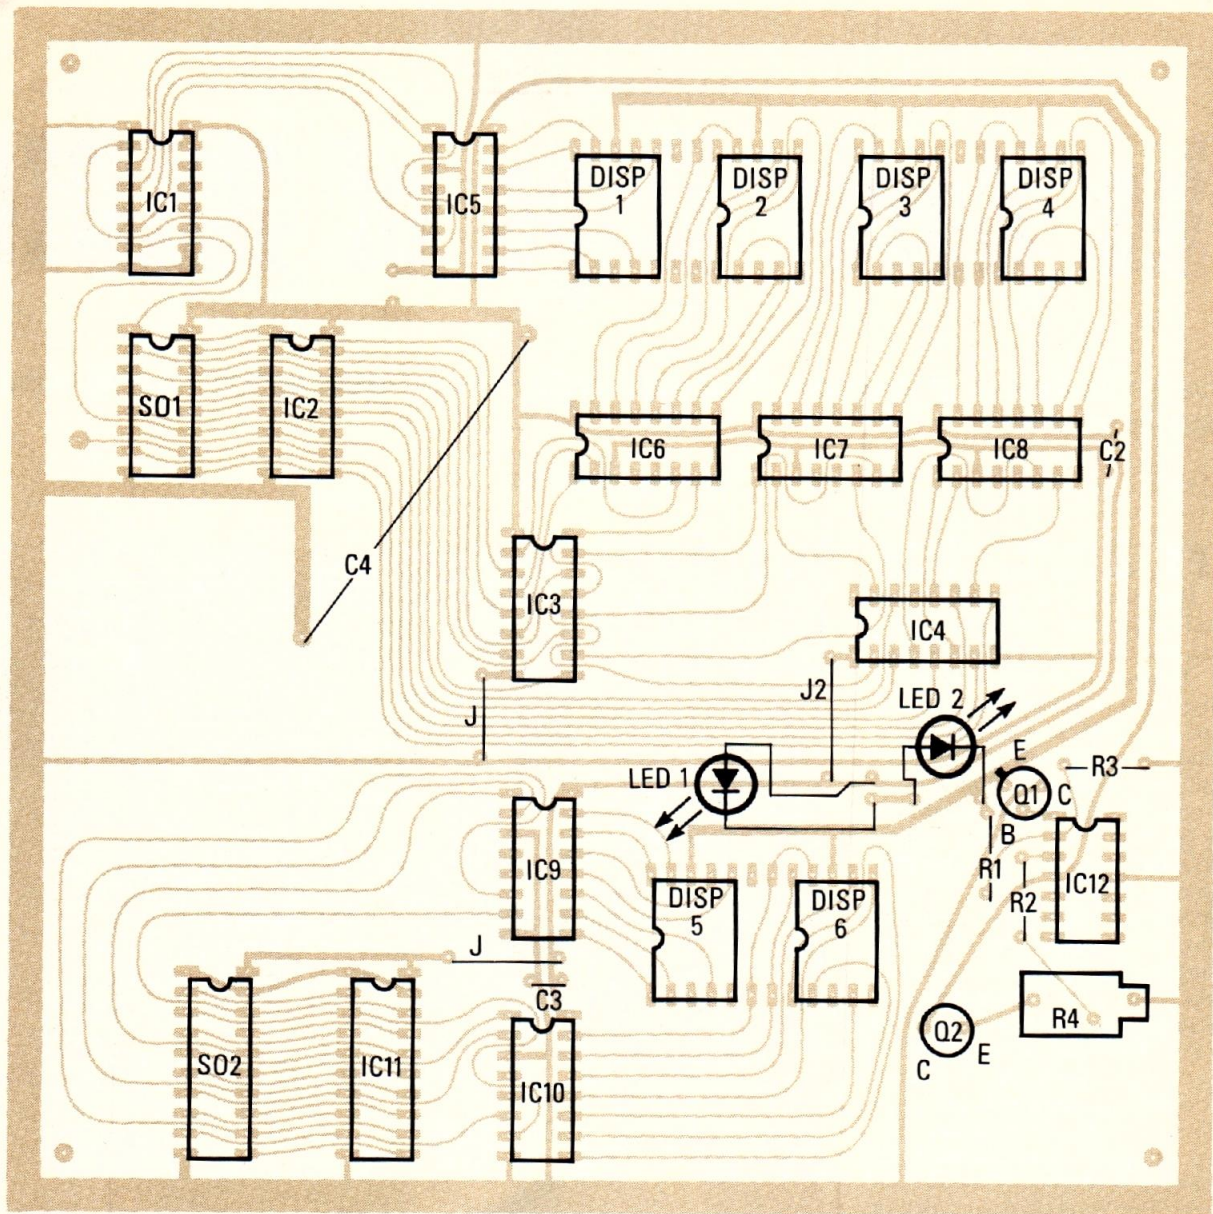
PHOTOTRANSISTOR Q2 AND LED2 must be mounted so that their receptive and transmissive surfaces receive no ambient light. Heatsink or tape them together. The foil pattern for this board is shown in PC service.
